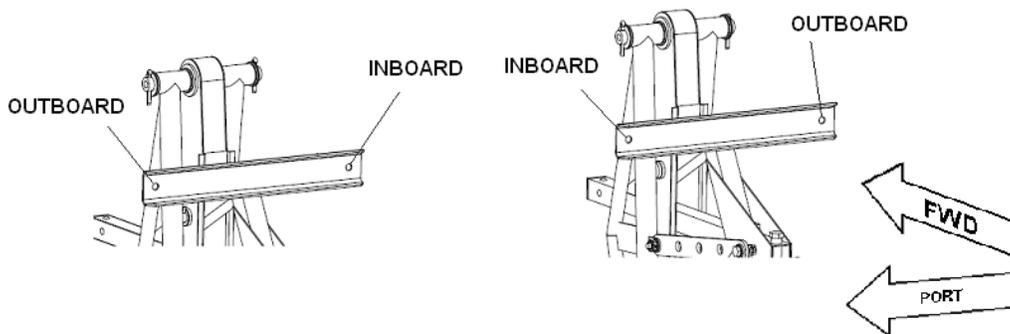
Rudder Pedal Assembly Mounting Bolt Locations
